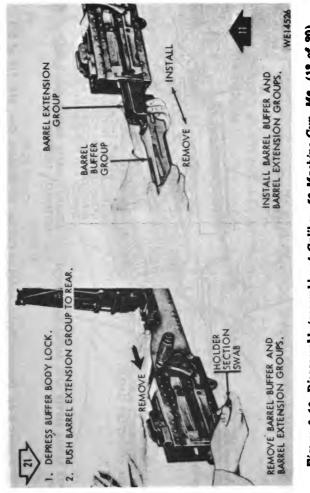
Disassembly/assembly of Caliber .50 Machine Gun, Ms. (12 of 20)
